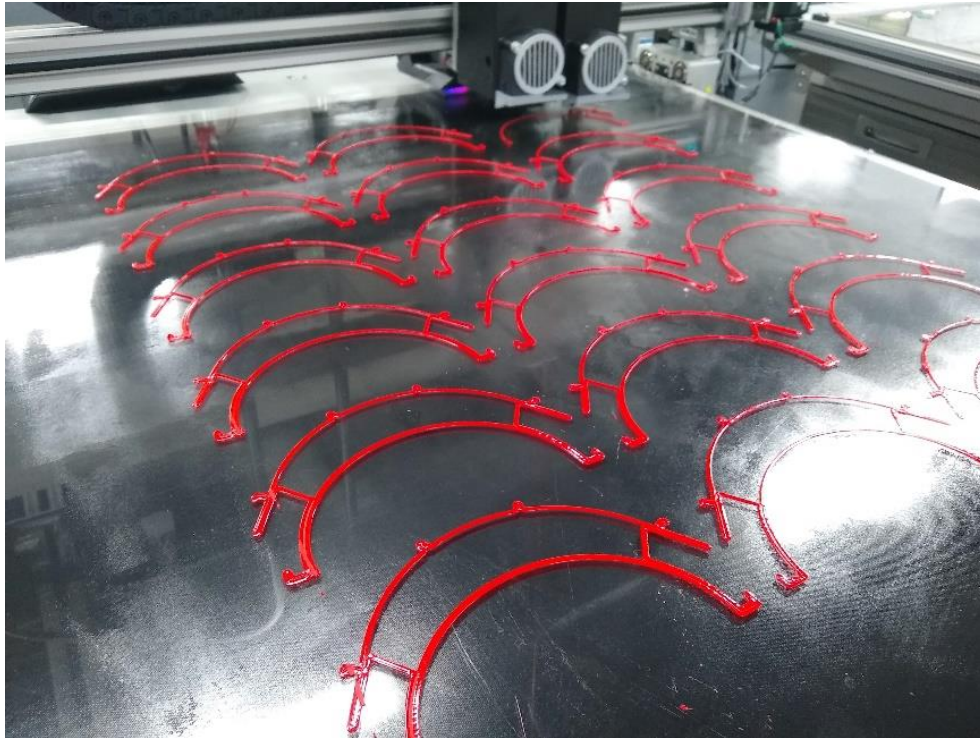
Multiple face shield headbands being printed on a single bed of a 3DPlatform 3D printer.
